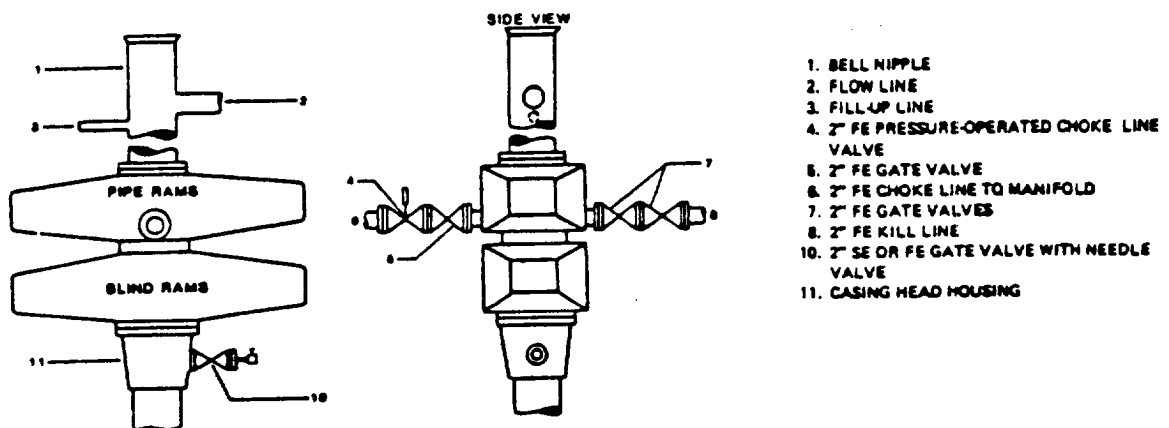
Standard Hydraulic Blowout Preventer Assembly (2 M or 3 M Working Pressure) Alternative 3 (without Drilling Spool)
